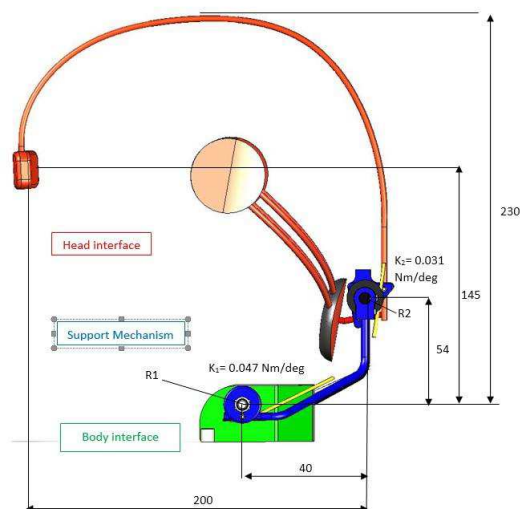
Three main parts: Head interface (red), Support mechanism (blue) and Body support (green). Main dimensions, pivot locations and spring stiffness's are given.
